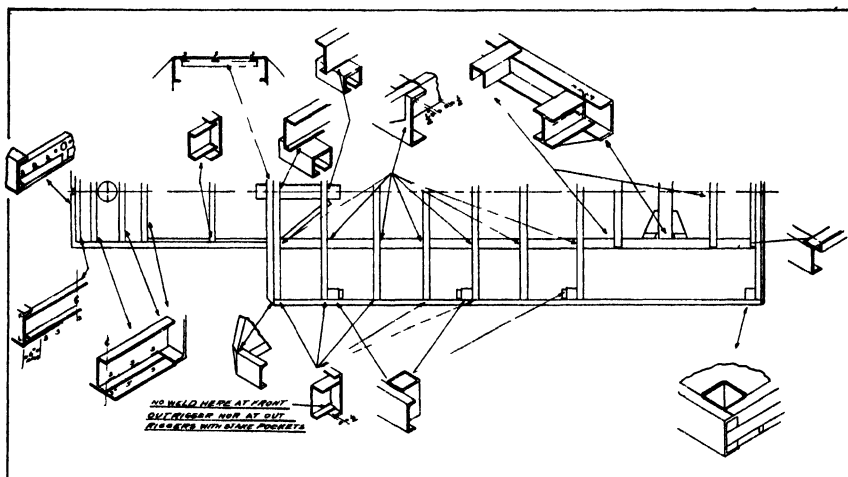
Frame is revolved and welded on upper surfaces.
